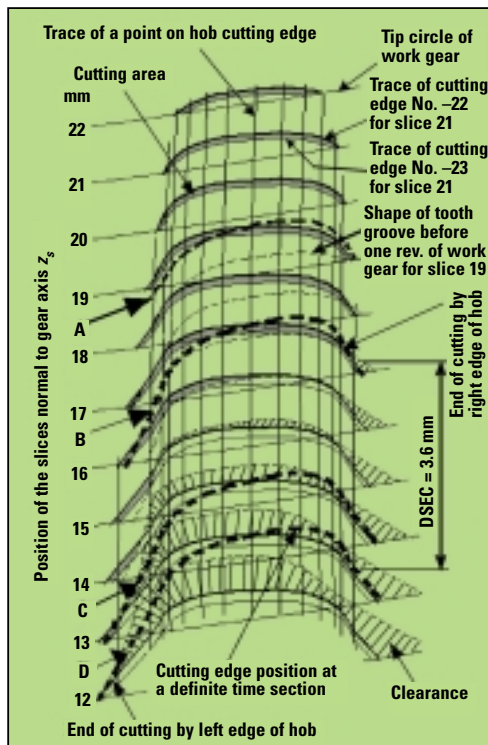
Expression of cutting area and clearance between work gear and cutting edge of hob tooth No. -22 (three-dimensional view). (DSEC: Distance of Single Edge Cutting.)
